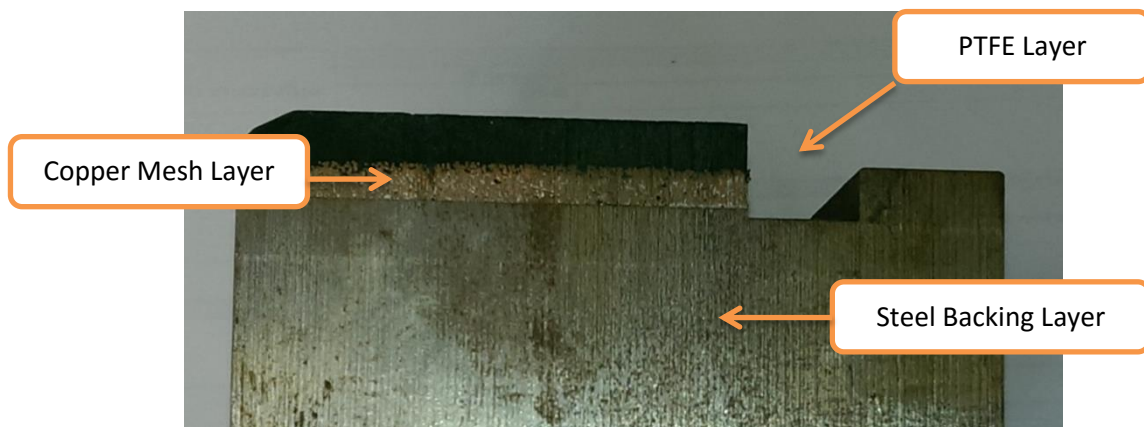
Cross section of a pad showing PTFE, Copper and Steel layers
